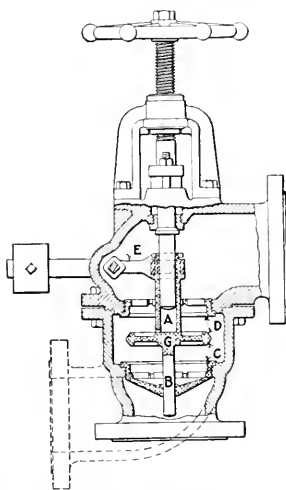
SIDE VIEW OF DOUBLE STOP VALVE
